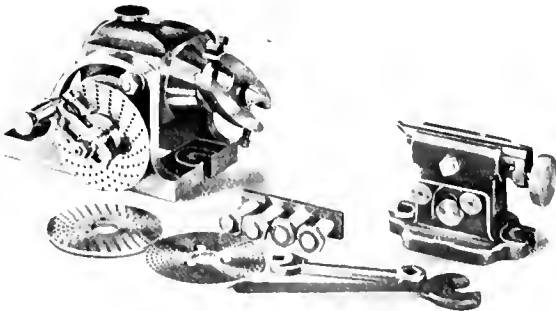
Universal Dividing Head, and Tail-stock for Fox Miller
